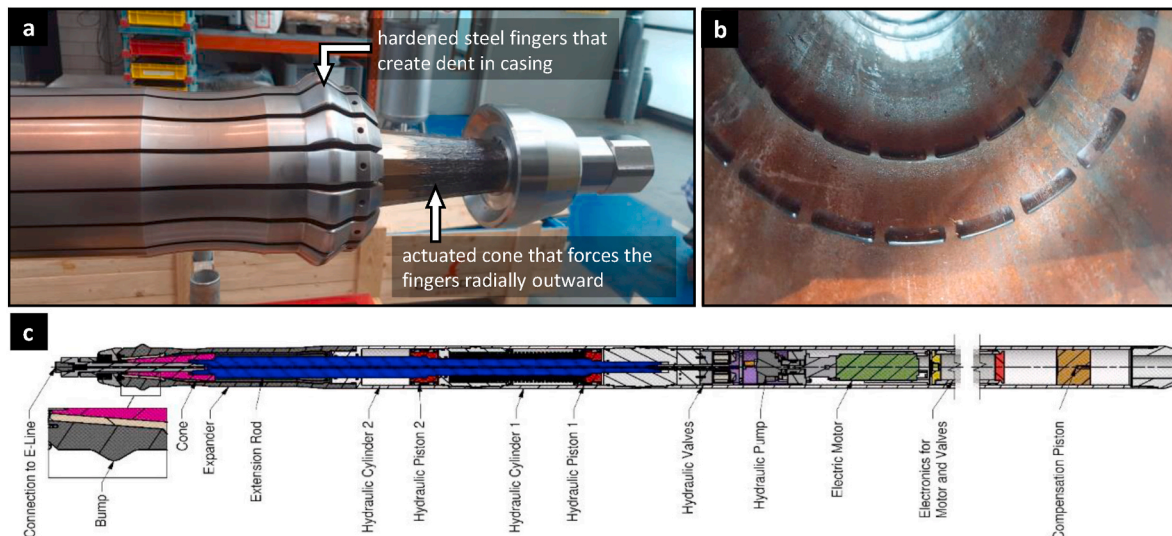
Overview of a 7"-model Local Expander tool, with a) photograph of an expander element with sixteen hardened steel fingers and actuated cone, b) photograph of the indentation marks visible on the inside of a casing pipe after Local Expander deployment (note the marks line up into rings), c) schematic cross-section of the complete Local Expander tool, showing the expander head, hydraulic pistons and balancing cylinder.
